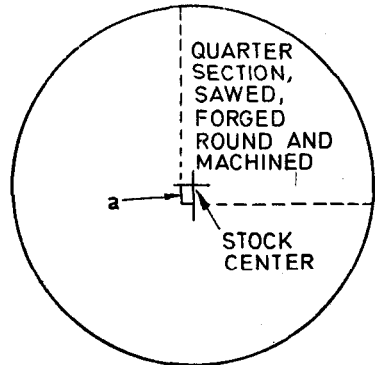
QUARTER SECTION SPECIMEN FROM ROUND SECTION FOR MAGNETIC PARTICLE TEST, FORGING AND MACHINING
